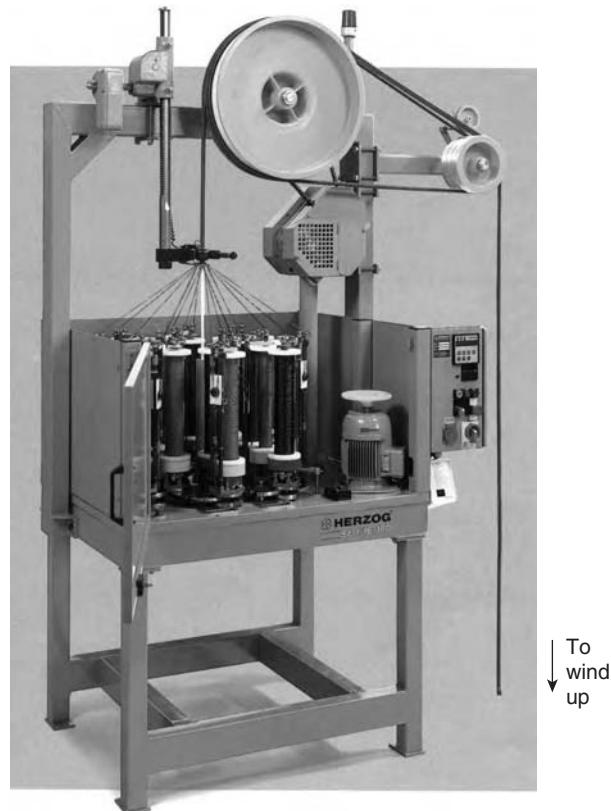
A small braiding machine. Reproduced by courtesy of Herzog.
